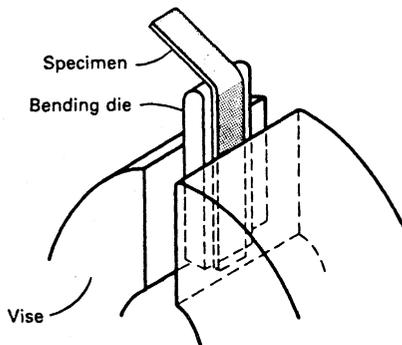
Schematic of a simple bending test. (From ASTM E290.)
